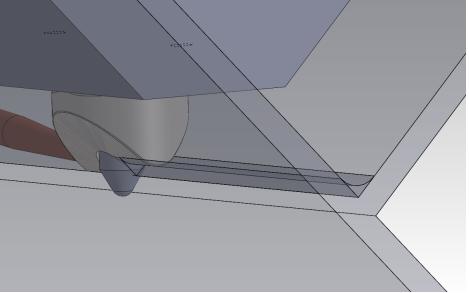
3D-view of the Shoulder Holder, Shoulder, Probe and Wire Guide with a weld piece containing a created weld fillet
